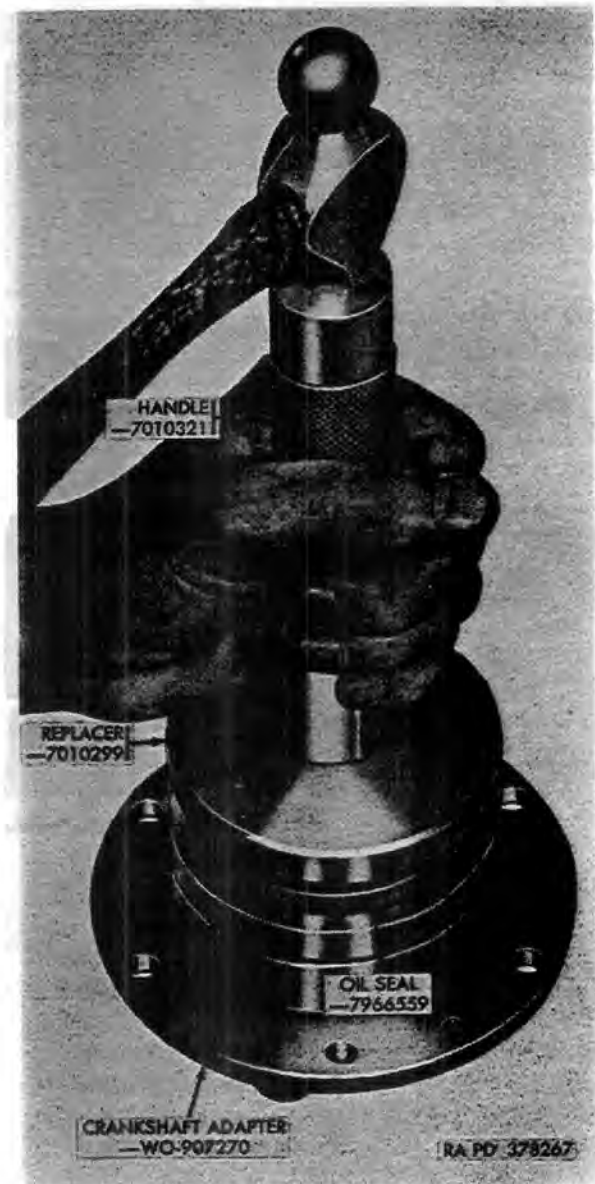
Installing rear main bearing oil seal, using replacer 7010299 and handle 7010321.
